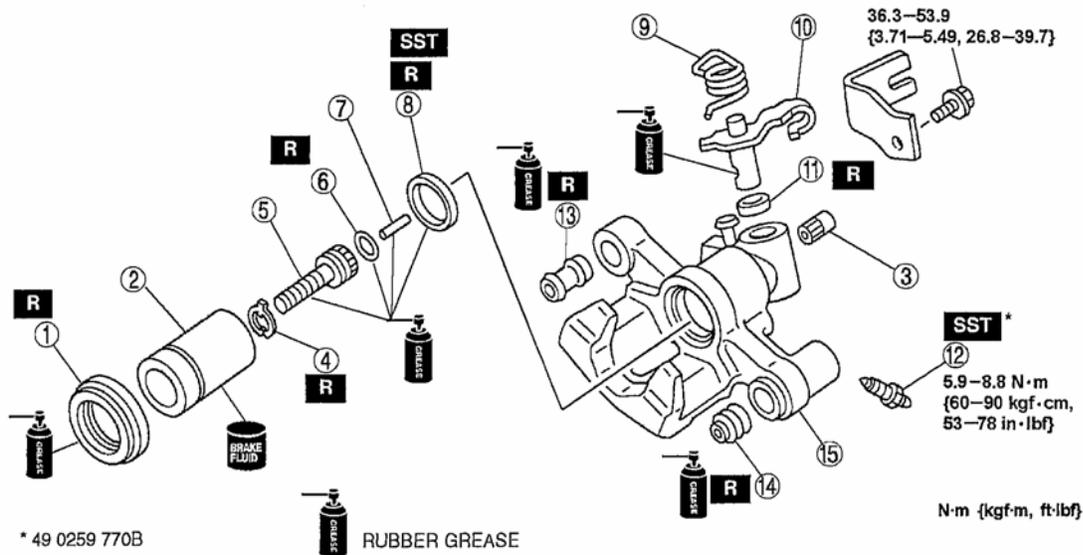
Exploded View Of Disc Pad (Rear) & Torque Specifications
